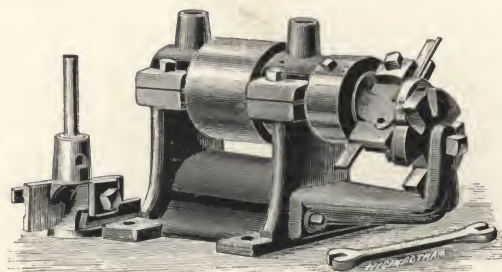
No. 1. Power Feed Dowel Machine.....	Code Word,
